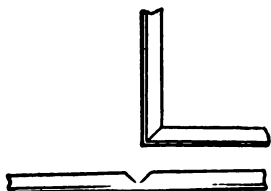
Method of cutting away an angle iron in the manufacture of a window frame by autogenous welding.
